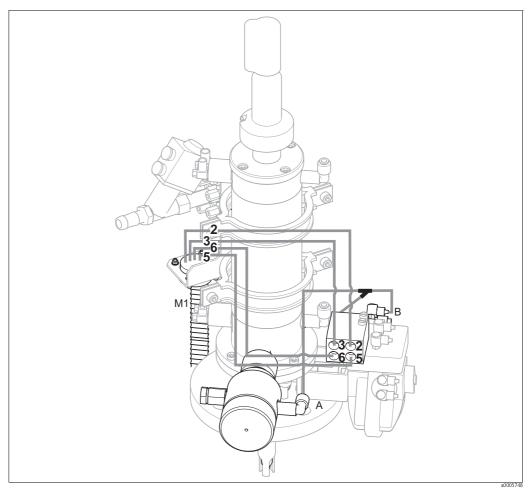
Connecting compressed air for controlling CPA473, CPA474 assemblies
